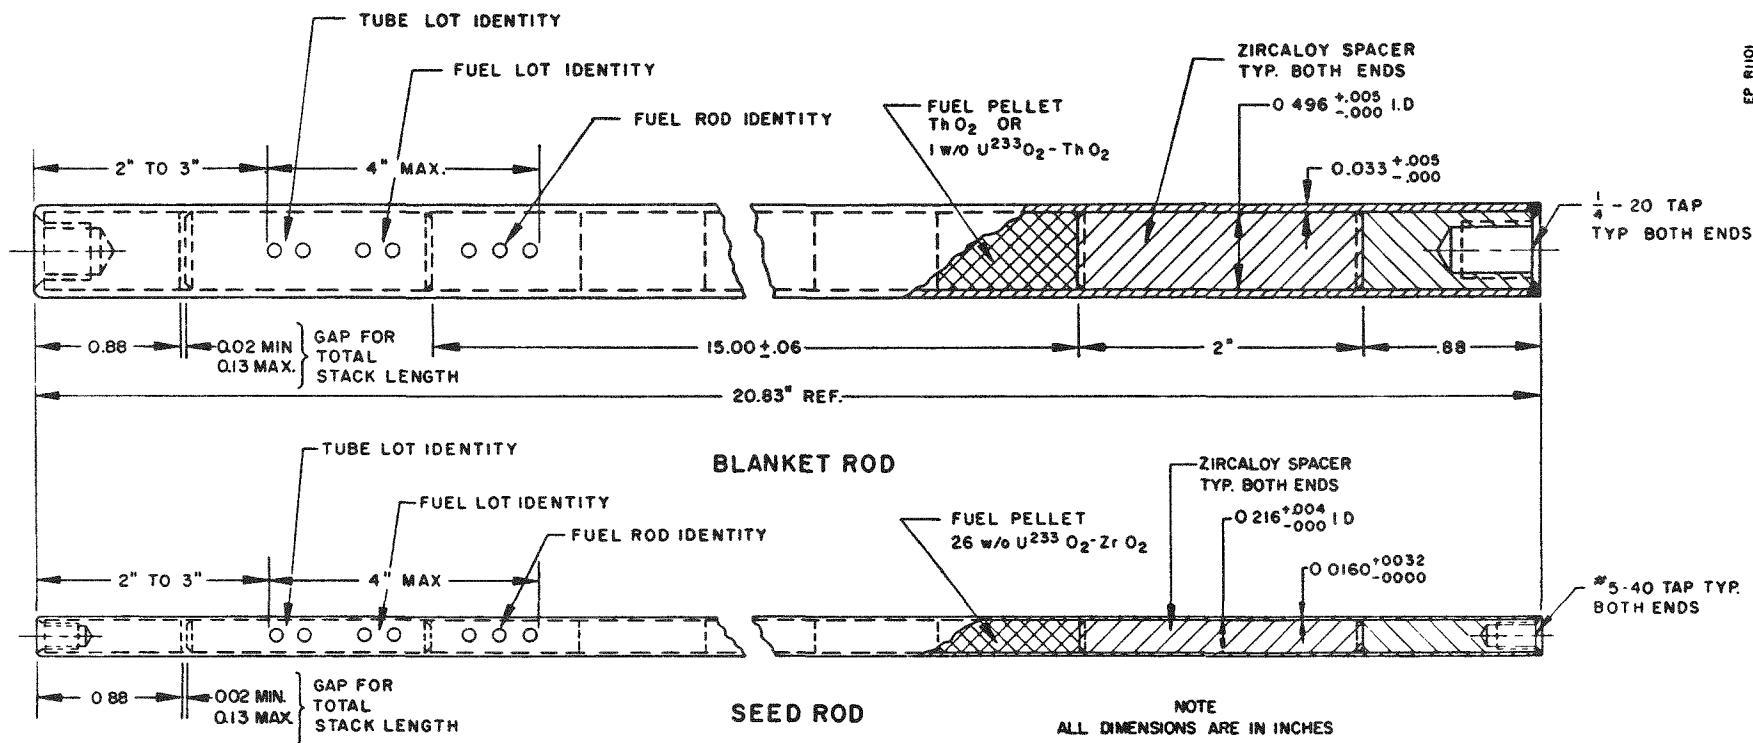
Sketches of Blanket- and Seed-Type Fuel Rods for U-233 Program.
